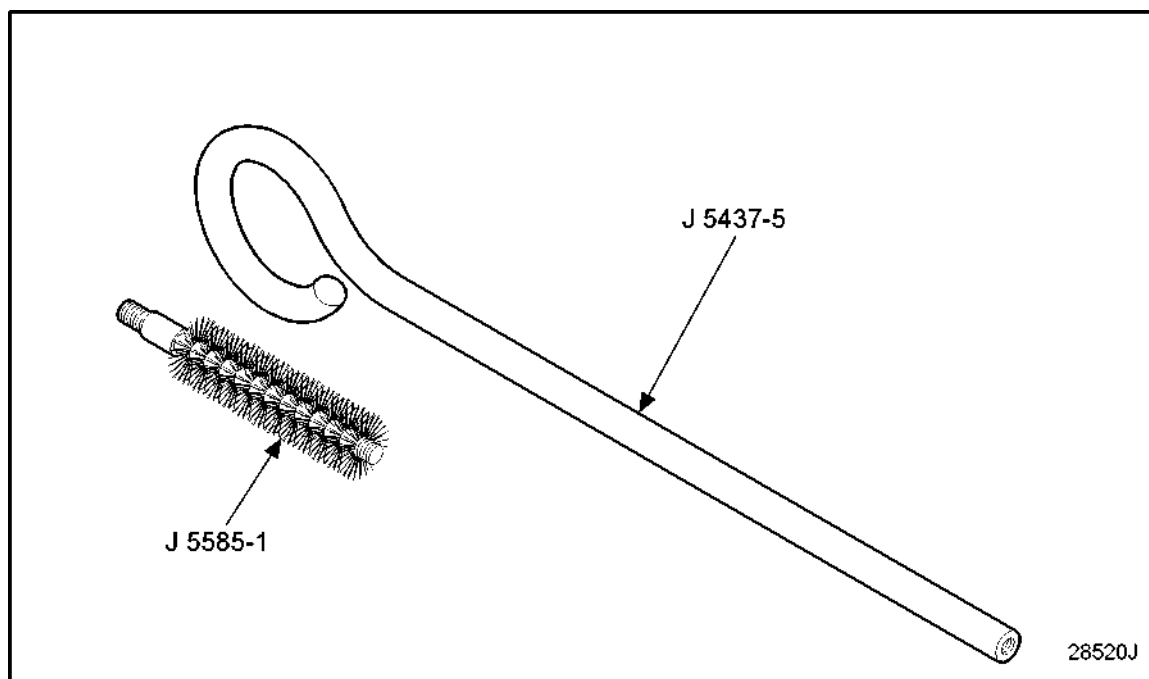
Valve Guide Cleaning Brush,J 5585
